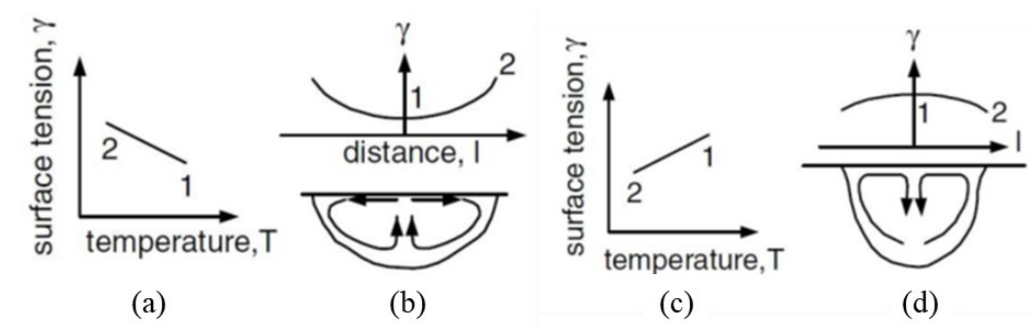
Schematic of fluid flow in a molten weld pool showing that when (a) $\delta\gamma/\delta T$ is negative (b) molten material inside the weld pool flows from the center of the weld to the boundary and when (c) $\delta\gamma/\delta T$ is positive (d) molten material inside the weld pool flows from the boundary to the center of the weld [33].
